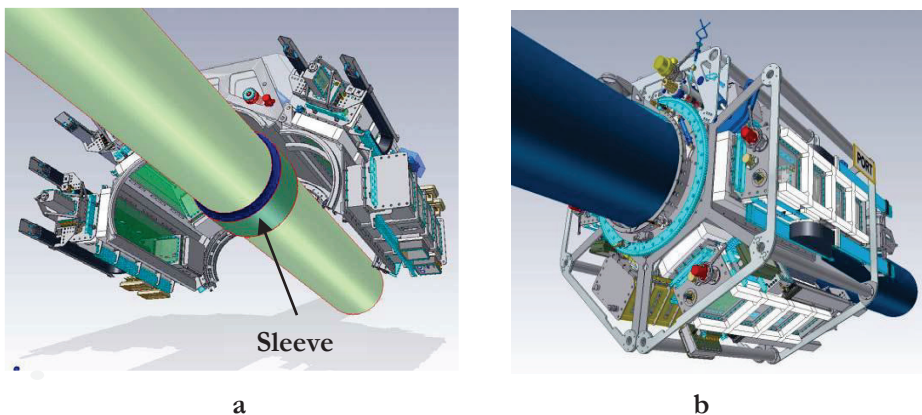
Sleeve repair technology and installation. Threading the pipelines into a sleeve (a) and the operating chamber (b) [6].
